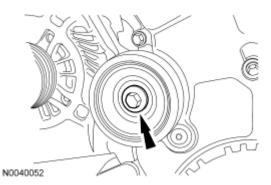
Locating Accessory Drive Belt Idler Pulley Bolt Courtesy of FORD MOTOR CO.
